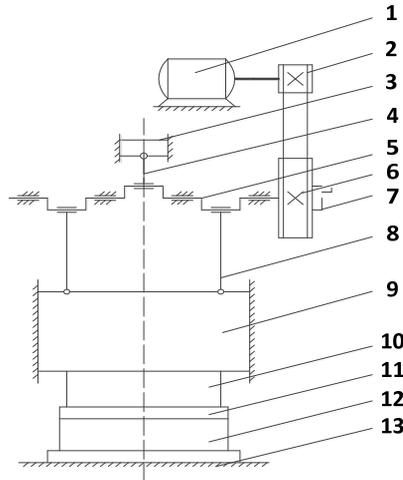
describes a typical working principle of the high speed press mechanism, which consists of driving device, transmission mechanism and base. When the mechanism operates, the movement of crank shaft is controlled by motor. Meanwhile, the reciprocating motion of main slider is driven by linkages. In order to balance the inertia force, the counterweight slider and additional linkage are designed at the opposite side of crank shaft. In addition, the processing of forging piece is conducted by the energy transferring (Chen et al., 2016). The constitution of the transmission mechanism for the closed high speed press is shown in Fig. 2(a), which is similar to a slider-crank mechanical system with balancing mechanism. In the model, the main linkage and main slider are connected by the revolute joint with clearance. Furthermore, the dynamic response of the slider-crank mechanism is affected by the revolute joint clearance.
